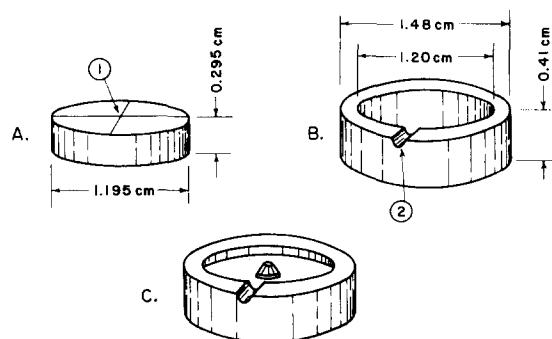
Diamond anvil assembly. (A) The boron carbide disk; 1 is an inscribed point to aid in diamond centering. (B) The pyrophyllite insulating ring; 2 is a semicylindrical slot for 1.6-mm-diam. ceramic tubing. (C) Diamond anvil assembly.
